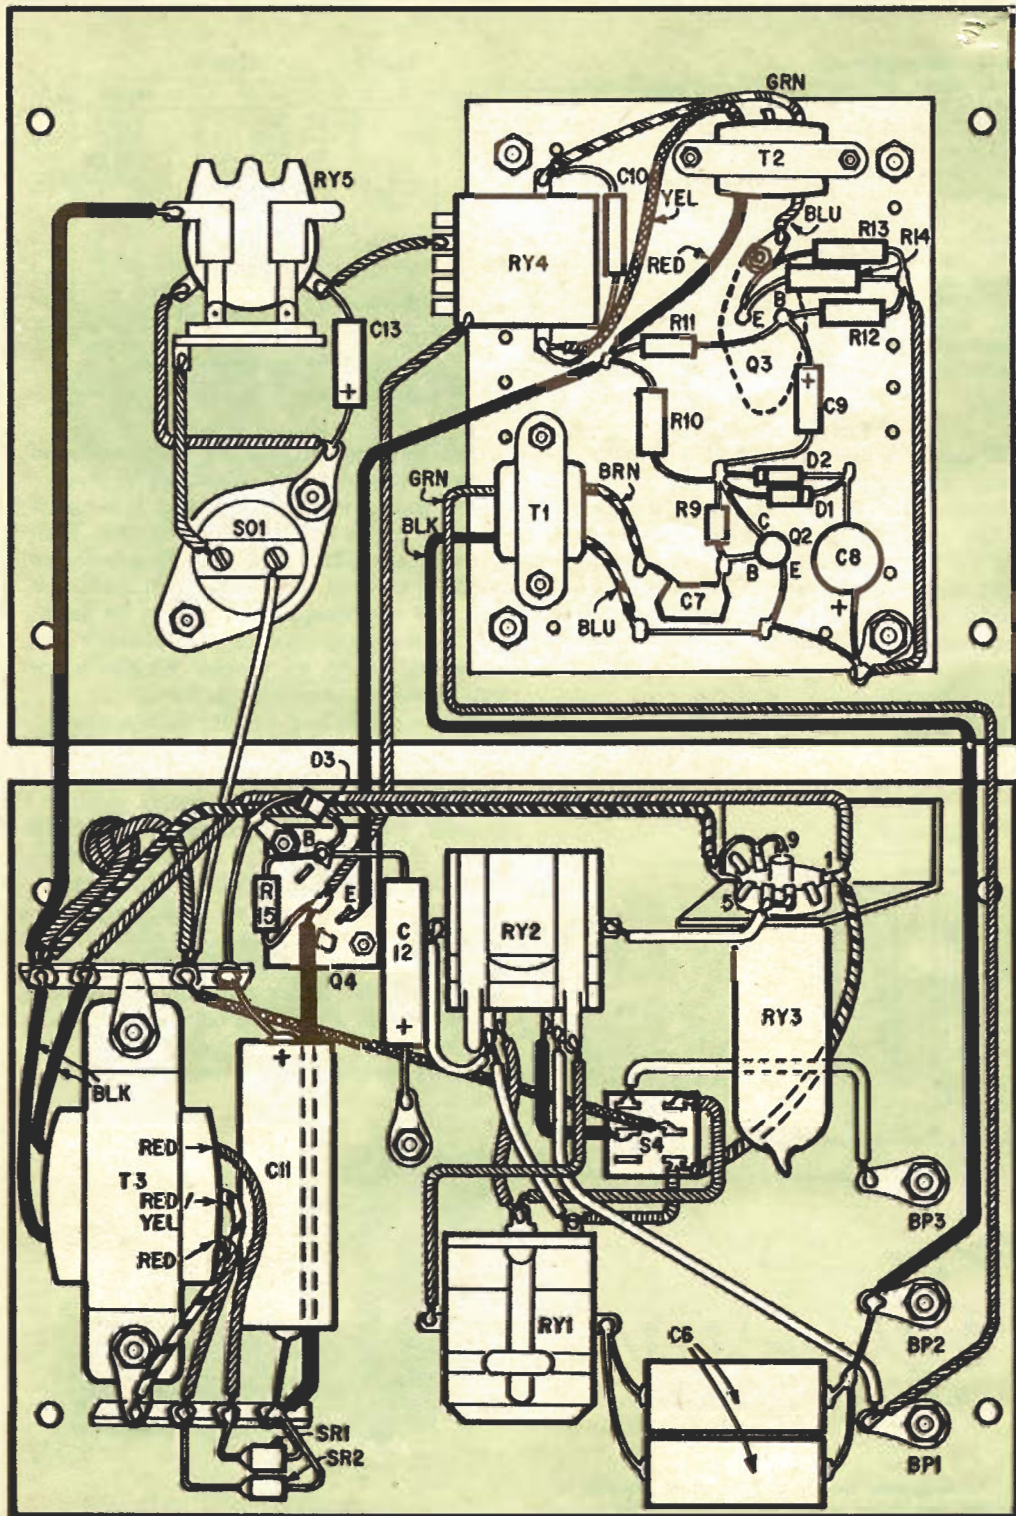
Amplifier panel, top and power-supply panel, bottom. Note on amplifier circuit board that Q3 is mounted on underside of board and wires are soldered directly to its leads. Make sure Q3's case (collector) doesn't touch aluminum panel. Transistor Q4 is installed on panel with a special mounting kit.
